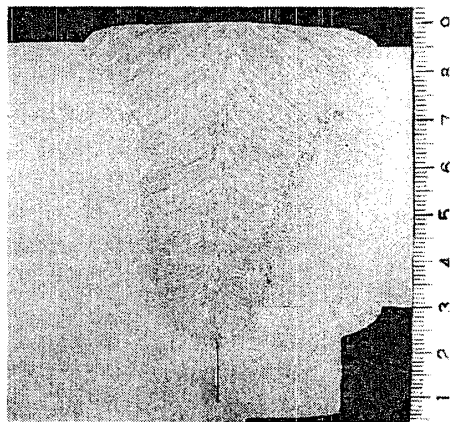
Example of weld macrostructure for 55mm thick steel by developed materials.
